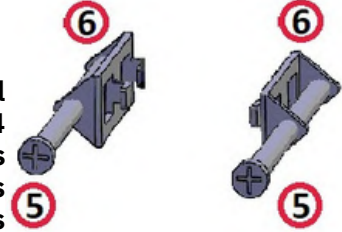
Double Claw Apparatus M4 YSB 60 mm Screw
